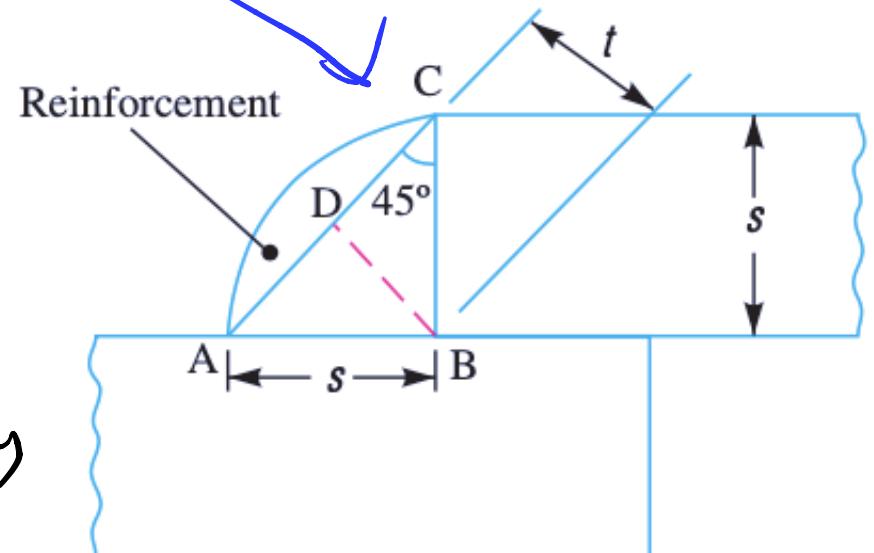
Enlarged view of a fillet weld.
